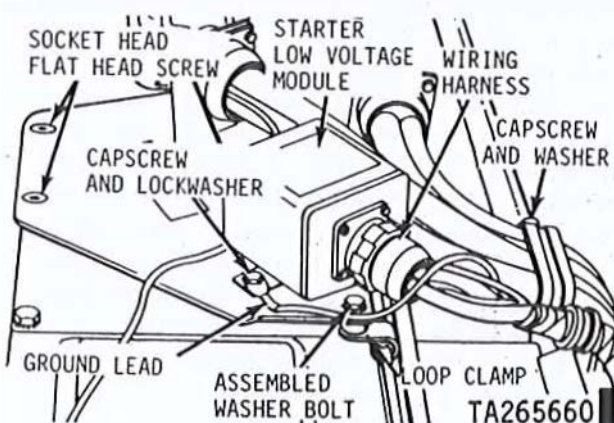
Removing or installing wiring harness mounting bracket, late engines.
